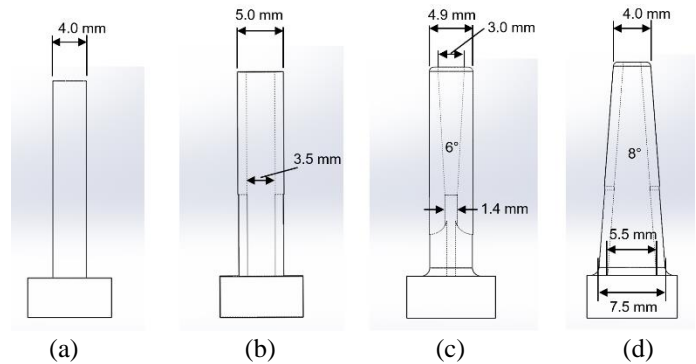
Dimensions of a single fin of each heat sink (a) cylindrical heat sink (b) hollow heat sink (c) nozzle heat sink (d) tapered heat sink
